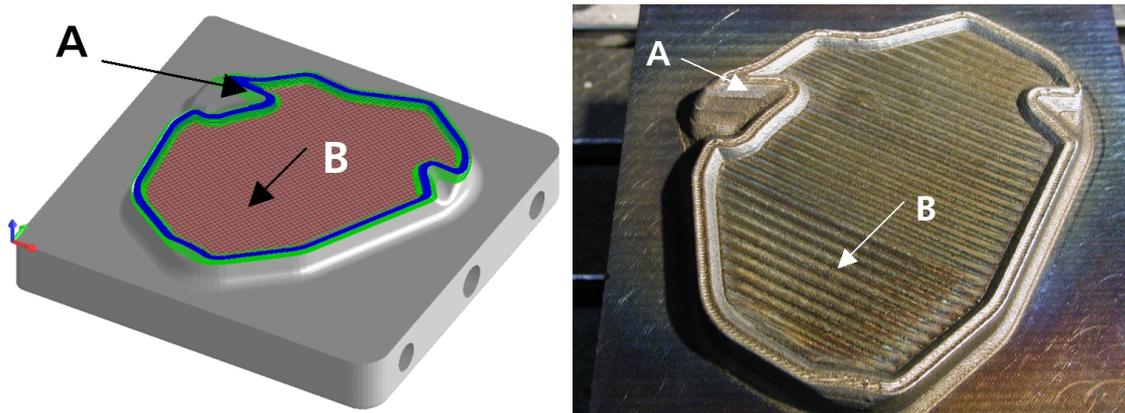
Generation of tools using laser-/ plasma build-up welding
